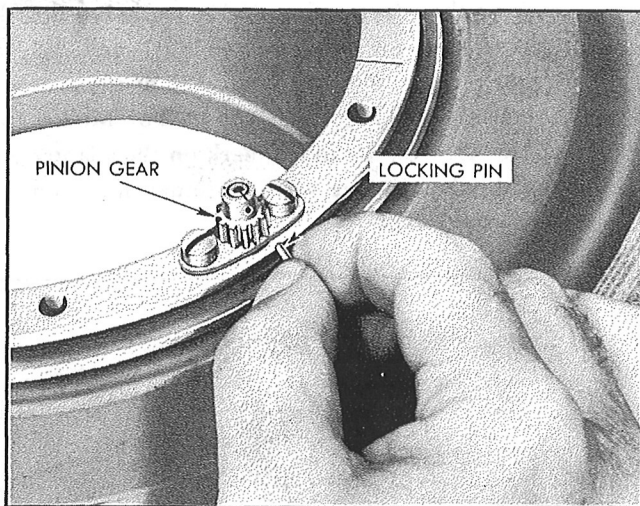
Removal of Control Screw Pinions, Models A632S-A1, -A2
